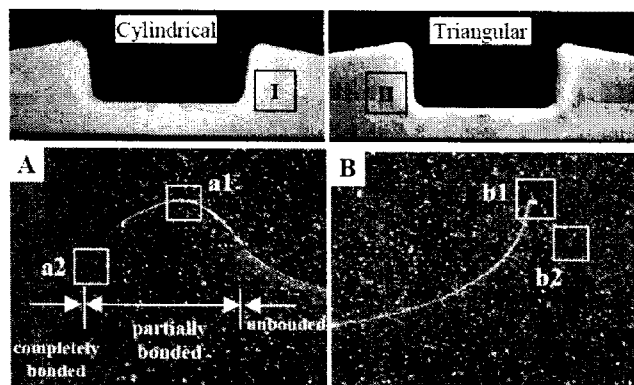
Micro-cross section at the weld center for the cylindrical pin and the triangular pin [12]
